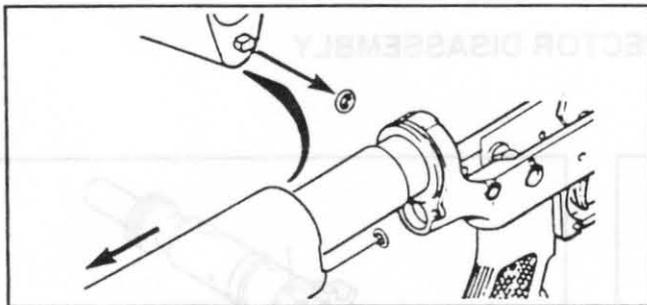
REMOVAL OF BUTTSTOCK AND DISASSEMBLY OF DETENTS AND TAKEDOWN PIN
